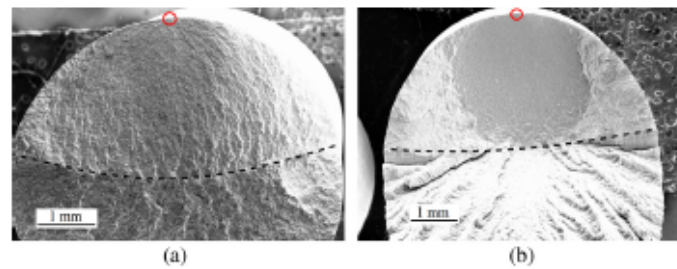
Fracture surface in tension of: (a) 18% reduced cross-section specimen and (b) 75% reduced cross-section specimen. Crack initiation is located at the top (circle). The crack front at the end of the fatigue test is shown in dotted lines.
